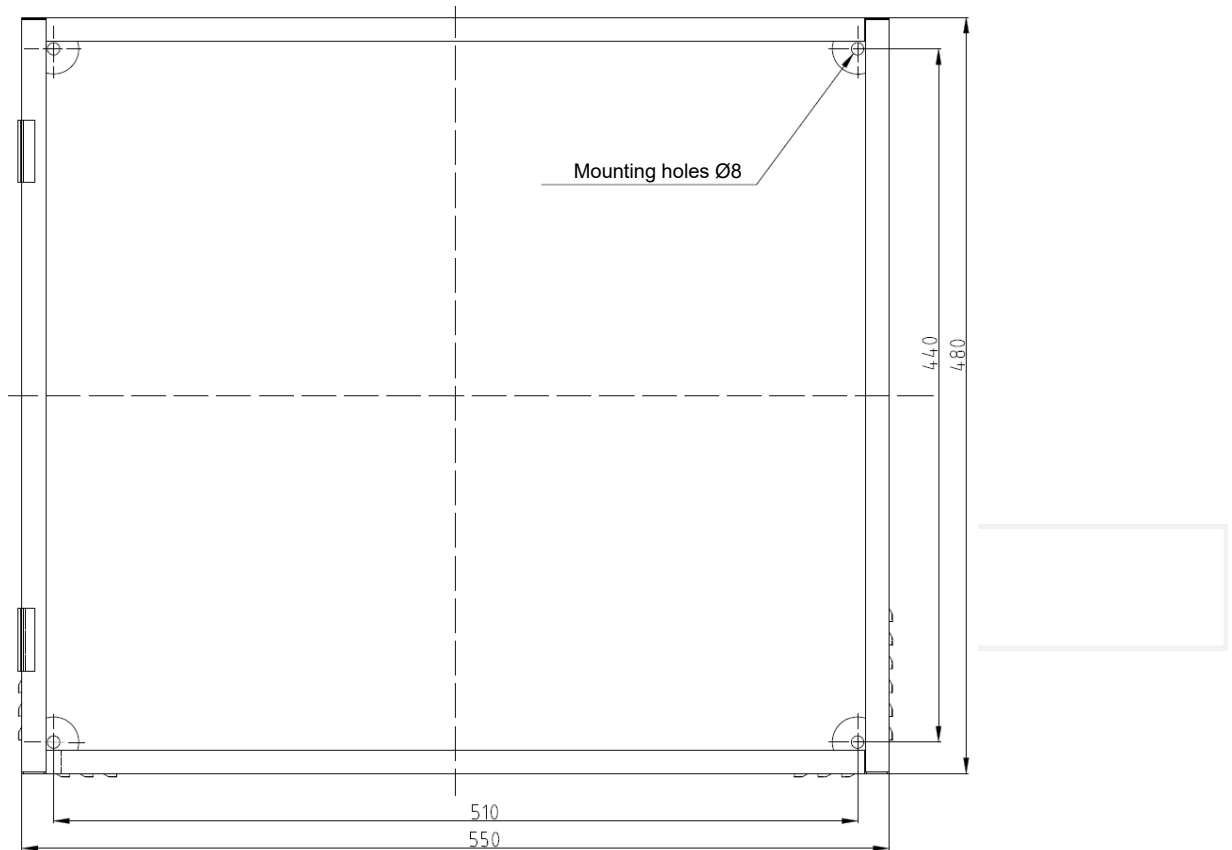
Mounting hole spacing for the 550 x 480 x 200 housing.
